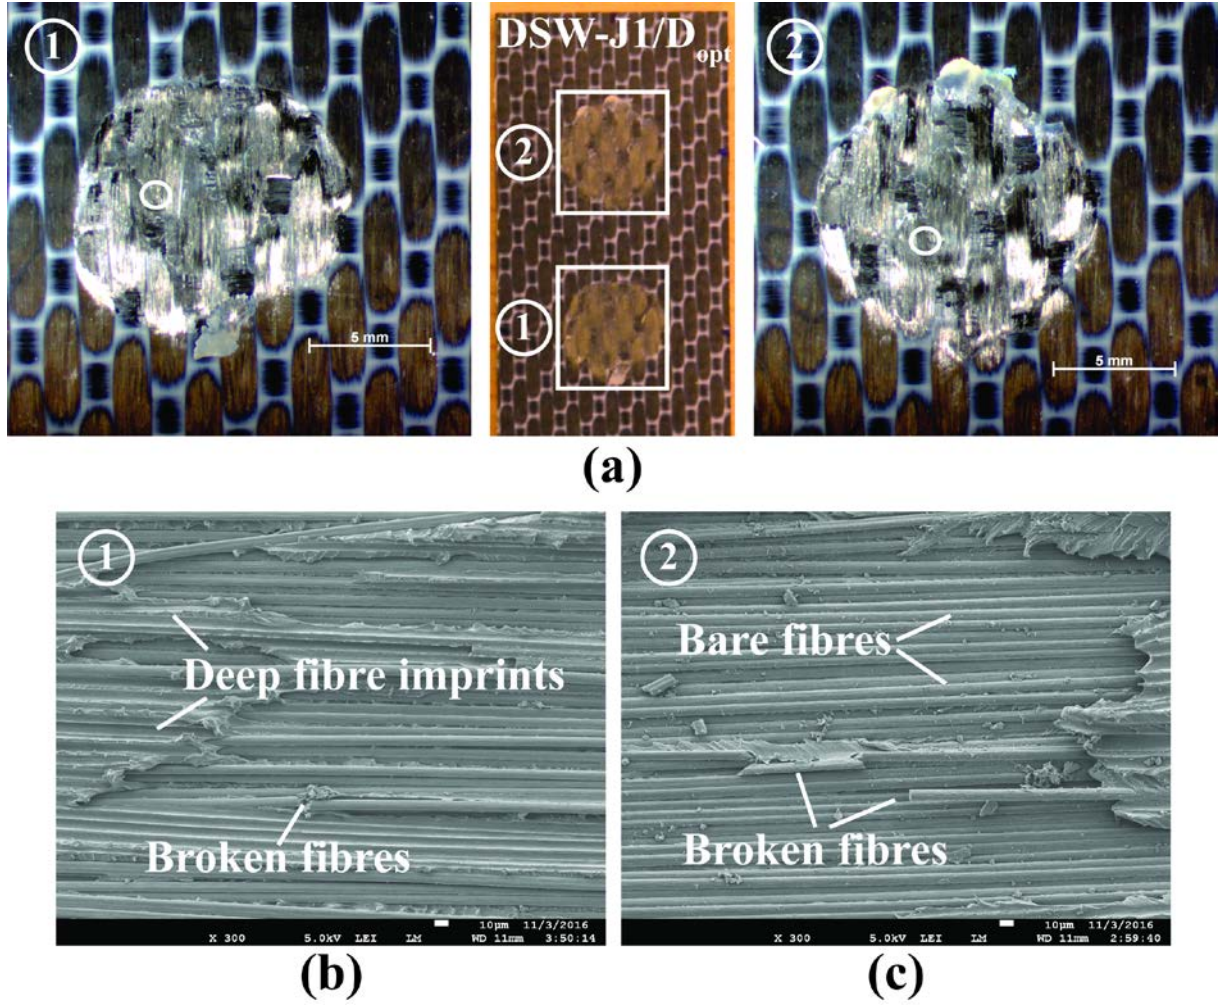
(a) Representative fracture surfaces of the DSW-J1/D_{opt} joints. The numbers indicate the welding sequence (Fig. 5). SEM micrographs (b) and (c) show the details of the areas circled in the fracture surfaces of Weld 1 and Weld 2, respectively. The scale bars are 5 mm (for stereo microscopy) and 10 μm (for SEM).
